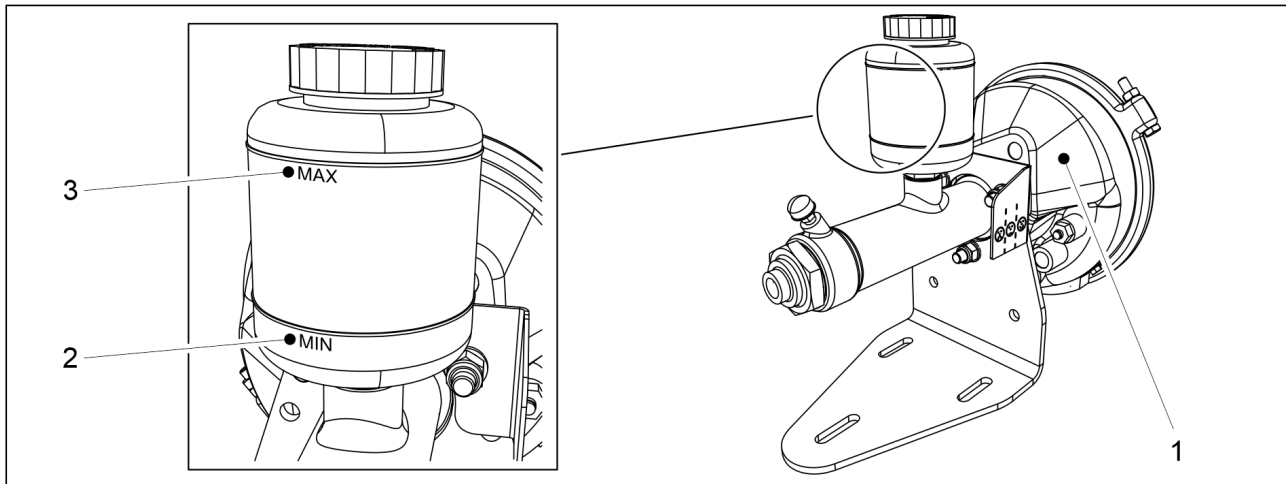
236. Checking the oil level in the pneumatic-hydraulic converter
